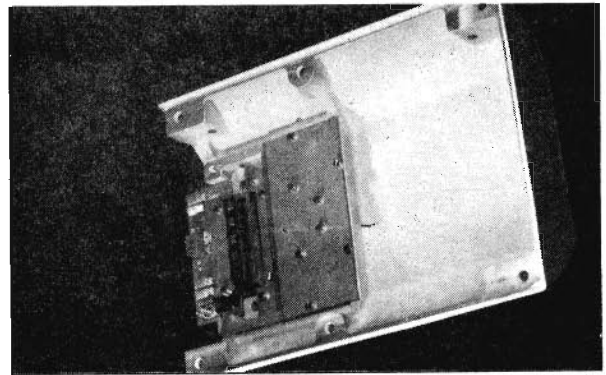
, couple-plate with BA1 board, the plastic cover is already removed.
